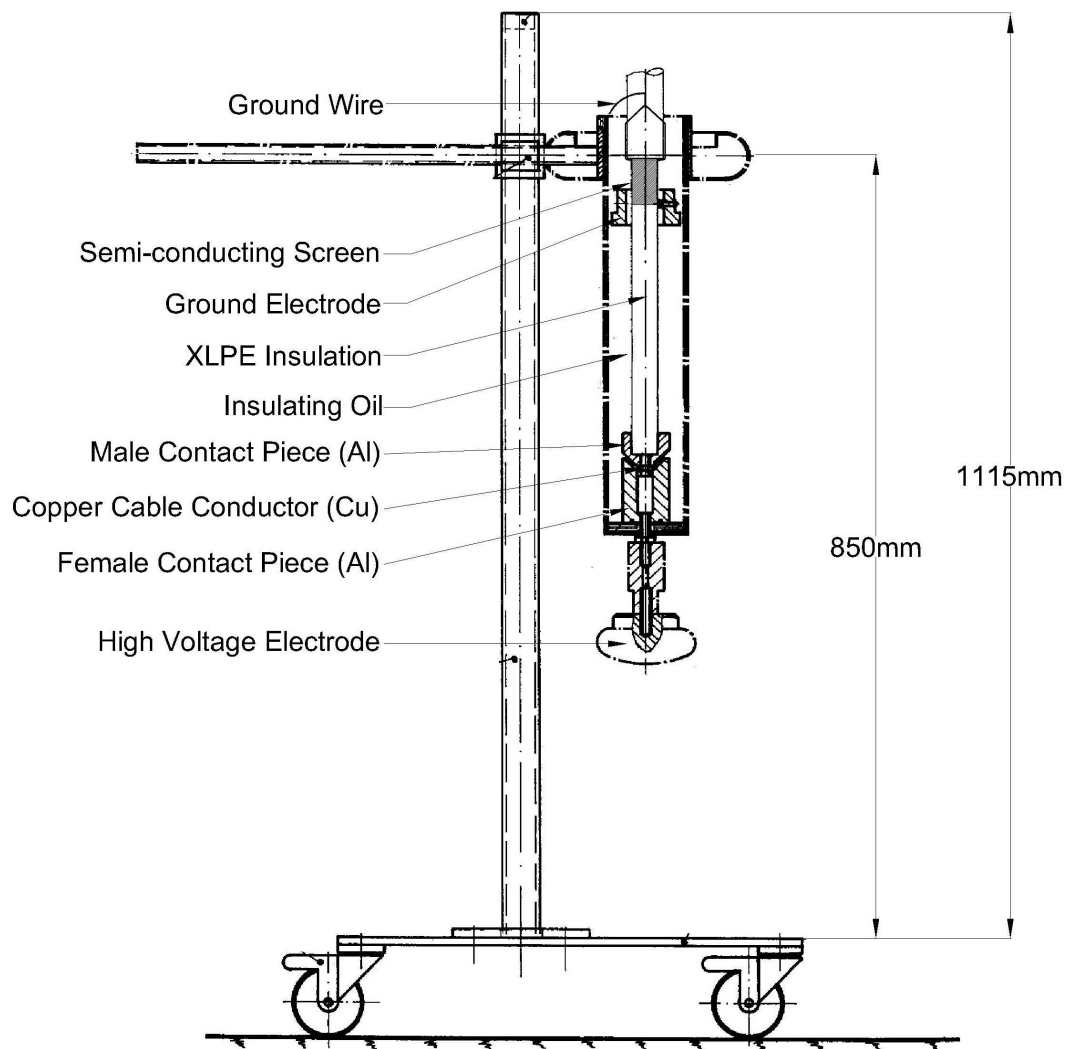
Cross-section showing main components and dimensions of KEV 50[™] Oil Test Termination.
